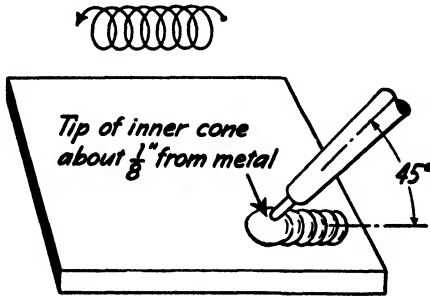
To carry a puddle without a welding rod, move the torch slowly forward, using a circular weaving motion. Adjust the speed of movement to keep the puddle of uniform width.
